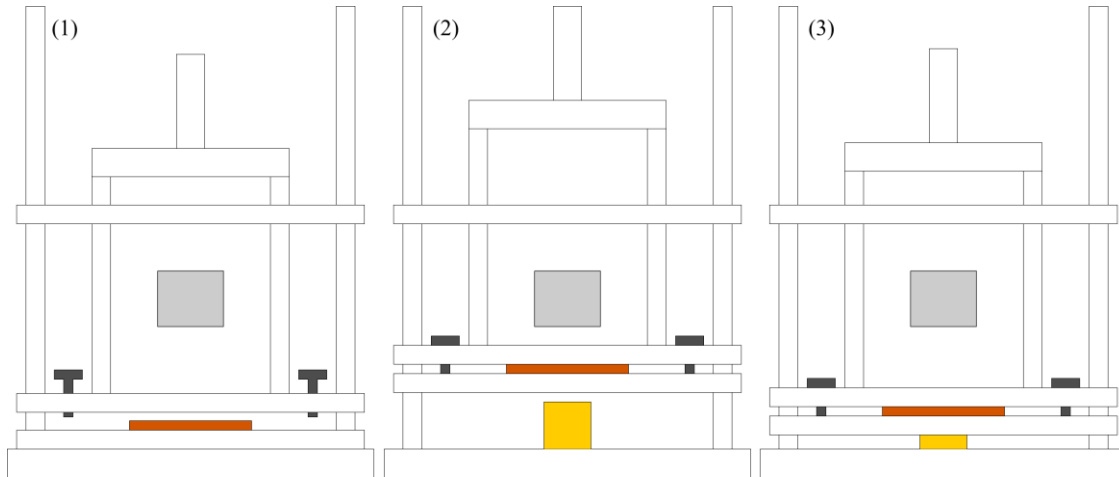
Schematic of the different steps to deform the blank with a flat-bottomed punch. Different colors are used for the following important components: mirror (grey), screws for the top and bottom parts of the blank holder (black), blank-assembly (orange), and brass punch (yellow).
